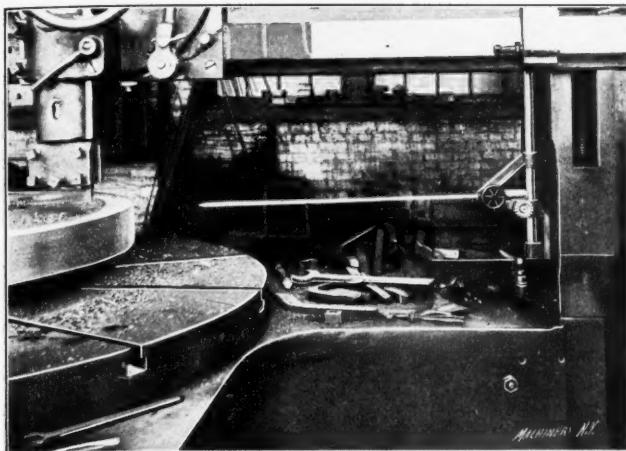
Device for Measuring Circular Work on the Boring Mill
